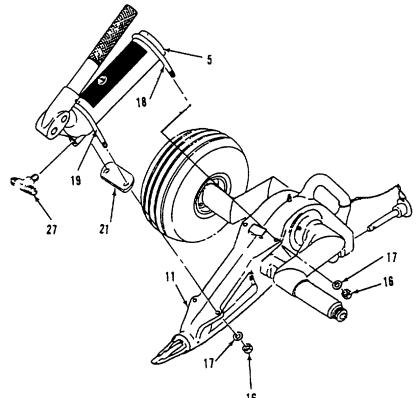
Hydraulic Pump, Part No. BU0953B
